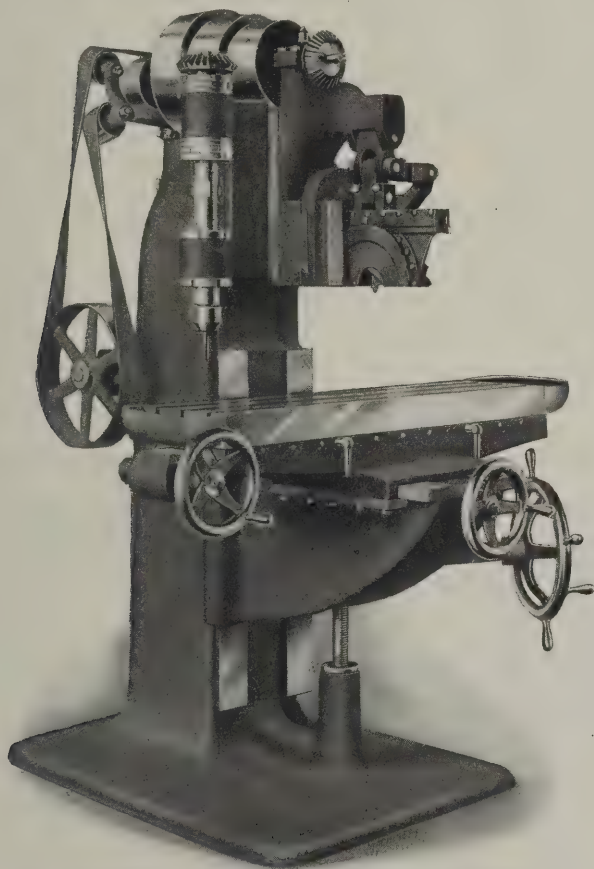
Die-sinking Machine manufactured by Melling-Northrup Co.
